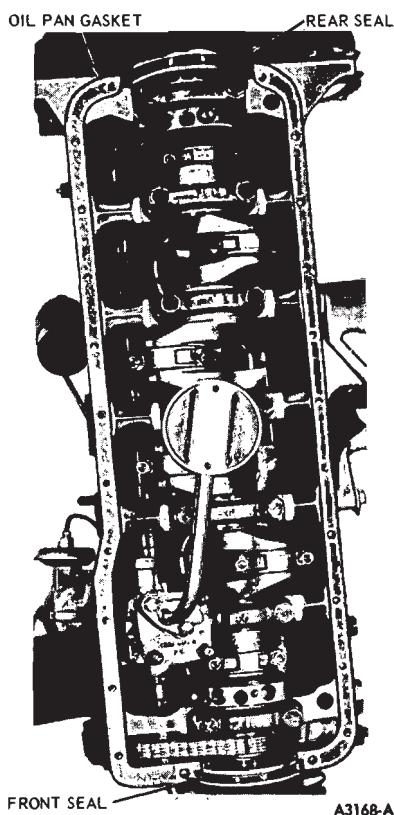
200 CID Six Oil Pump Inlet Tube Installed
